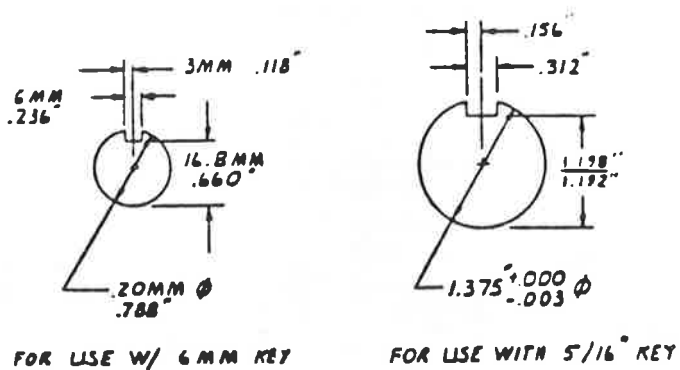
Detail of Vibro-Driver: Motor Shafts
